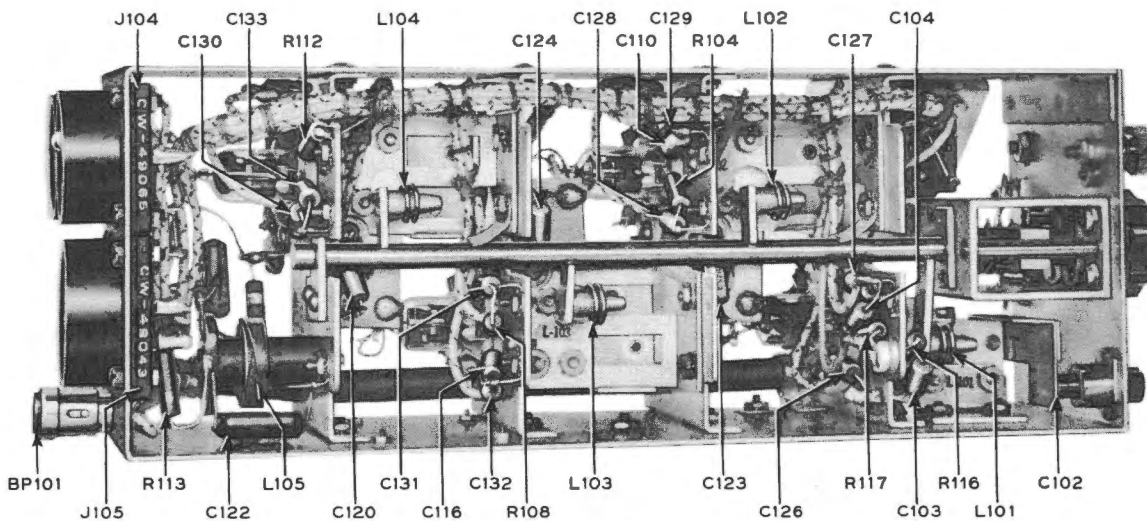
TYPE CW-69076 HOMING ADAPTER UNIT—INTERNAL BOTTOM VIEW FOR SERIAL NOS. 1-4692 INCLUSIVE
